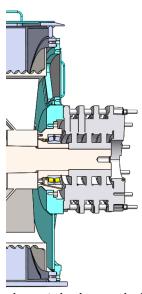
Eaton Airflex dyanmic brake attached to the sheave assembly
